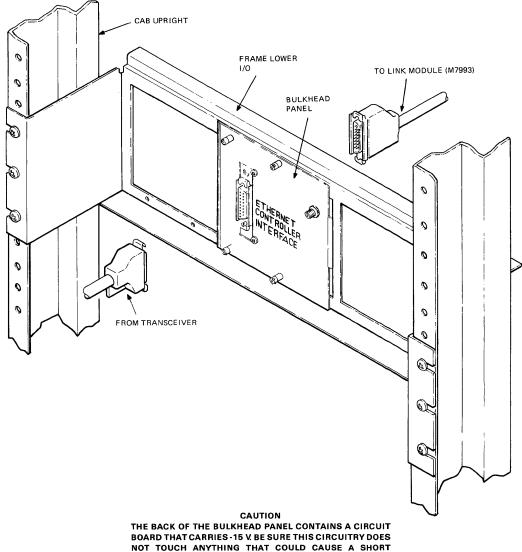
Bulkhead Interconnect I/O Panel Assembly
